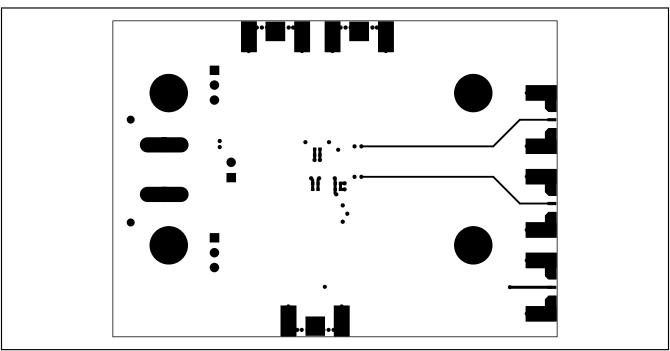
MAX3622 EV Kit Layout—Solder Plane
